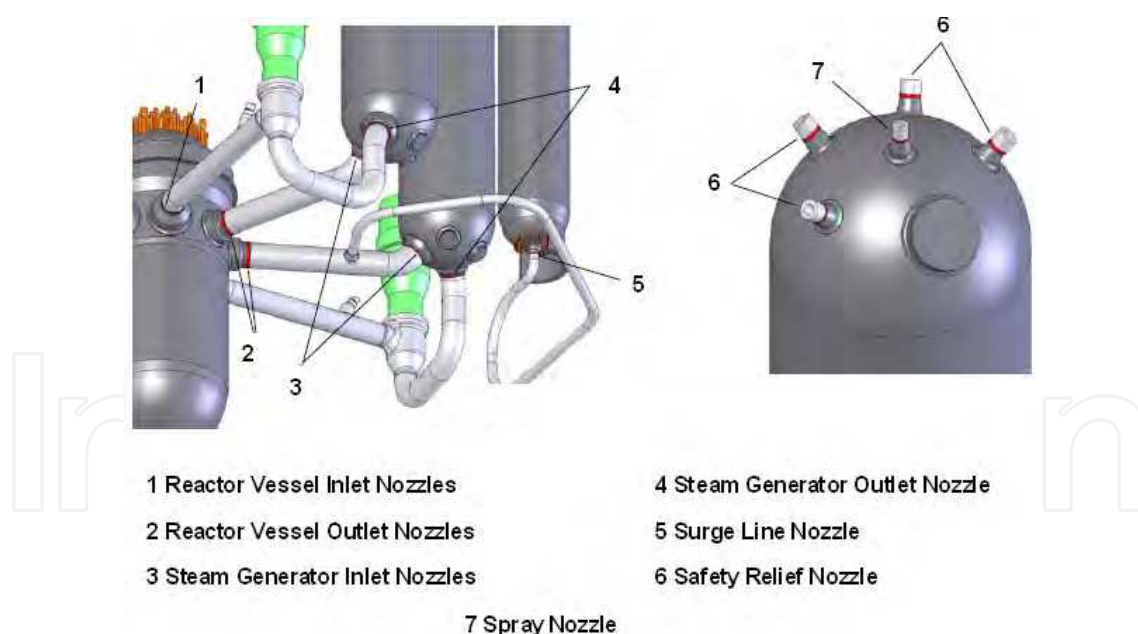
Alloy 82 and 182 butt welds locations in PWR Westinghouse design plants (King, 2005).
